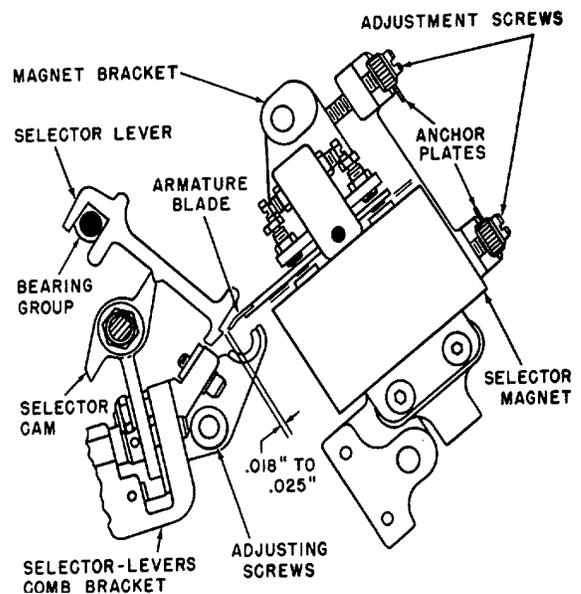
Selector magnet armature blade and selector lever clearance.
